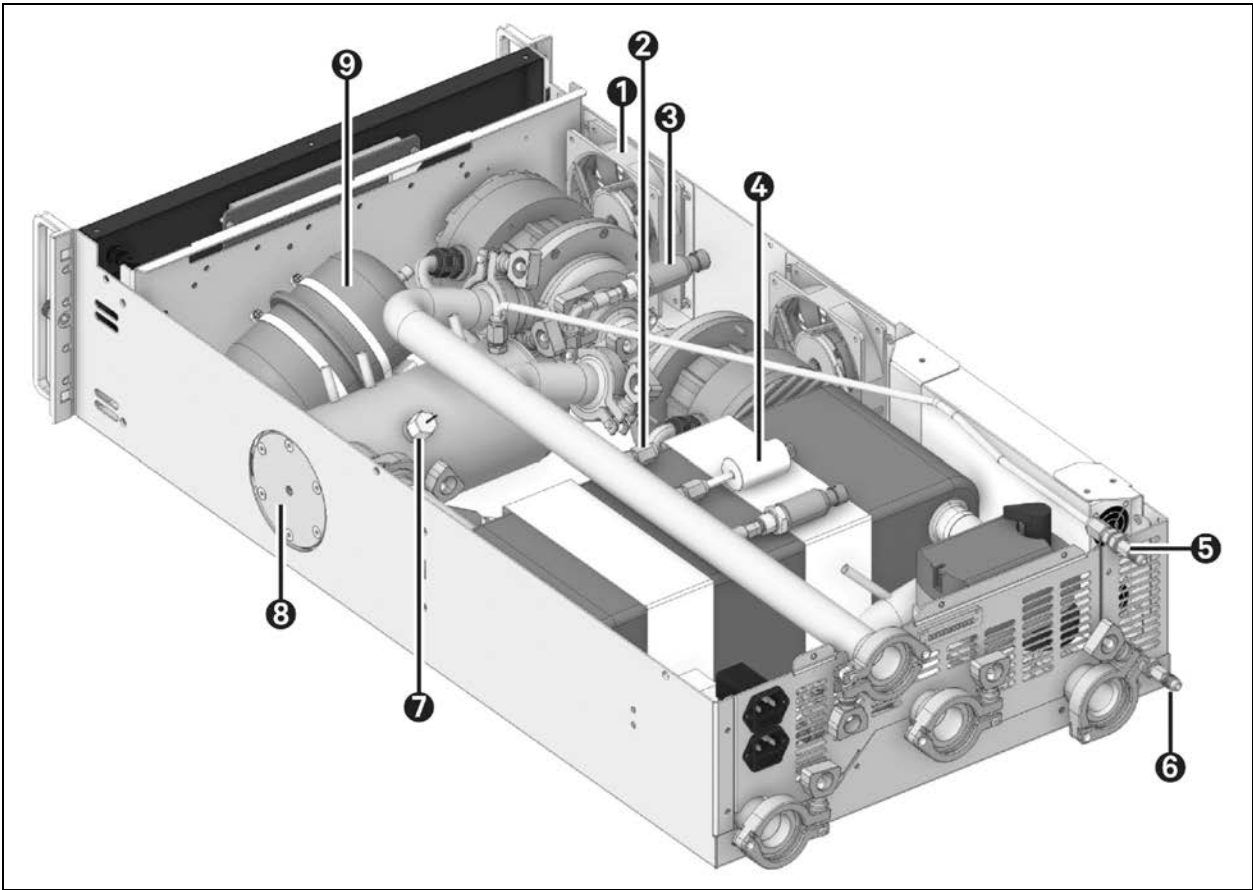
Front View of Vertiv™ CoolChip CDU 100 (Top Cover Panel Removed)
